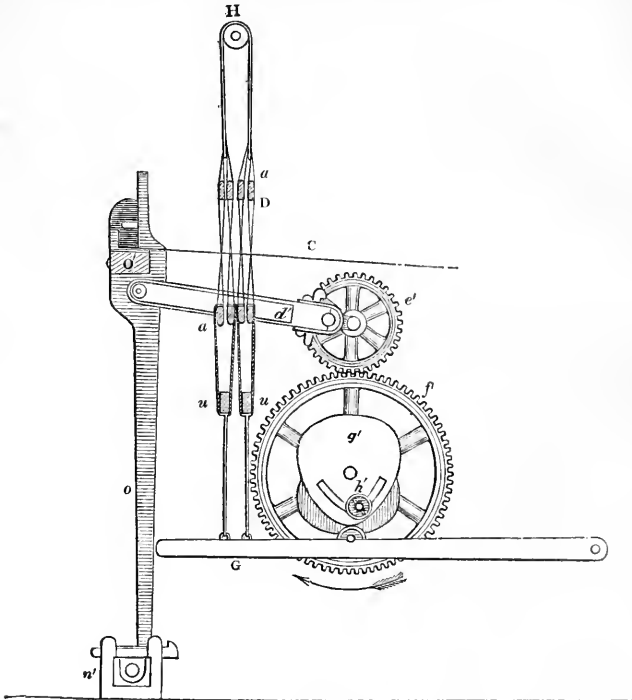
Section of Moving Parts of the Crank Power Loom, without the Frame.
